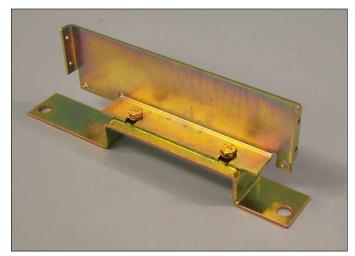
Trip Unit Mounting Bracket Installed on the Trip Unit Mounting Platform.
